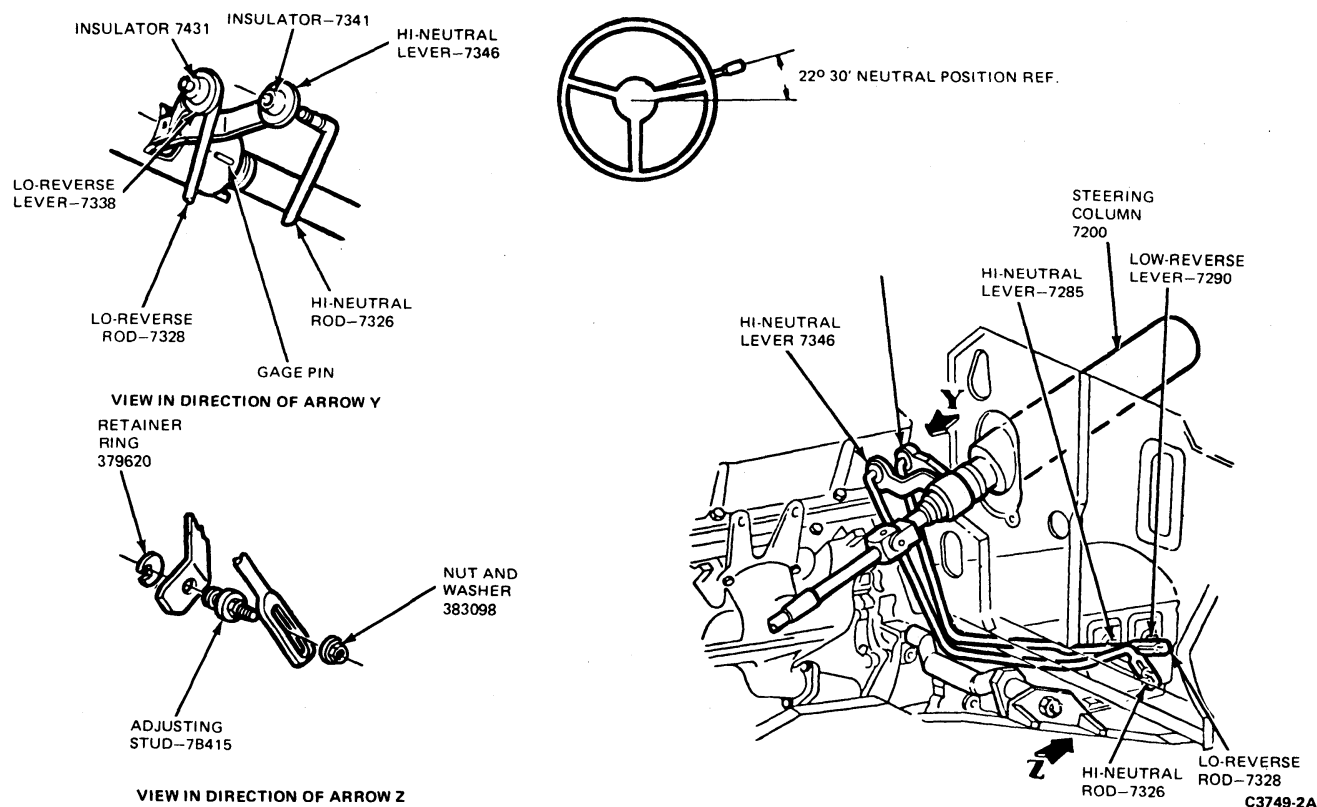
Gearshift Linkage Adjustment—F-100—F-250
